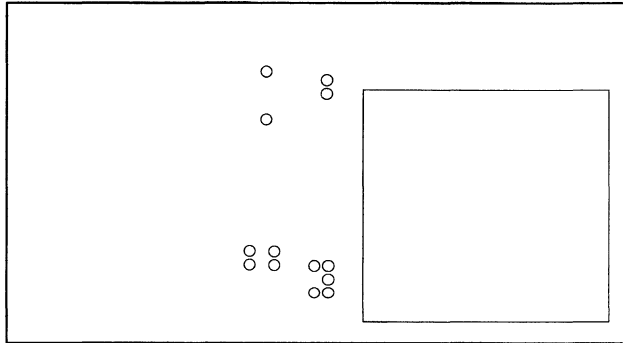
TRF1400 Test Circuit Board Solder Mask — Bottom Side
